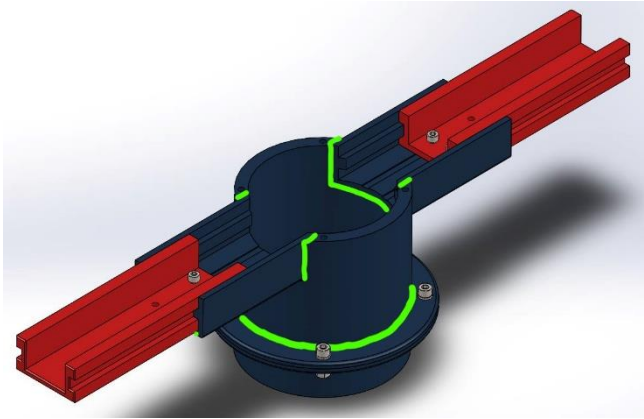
Isometric view on the arm system with emphasized welds.
